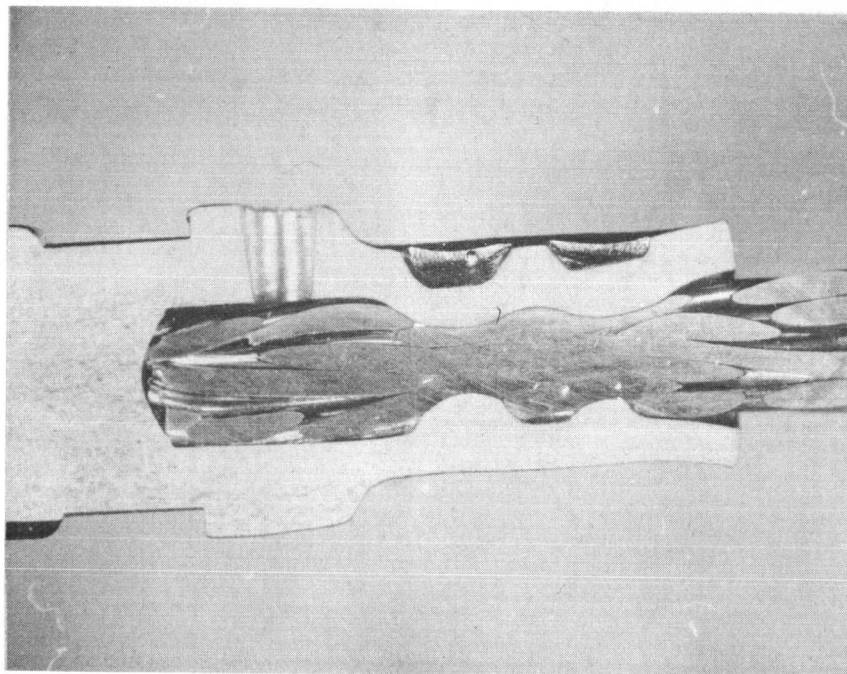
CESO-16-DO54-16 Crimped Contact, Sectioned View
